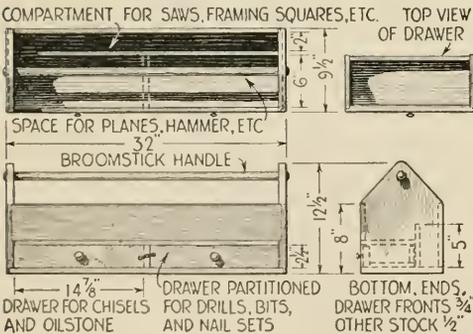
The front and end views of the tool-carrying box shown in Fig. 36, and the drawer.
